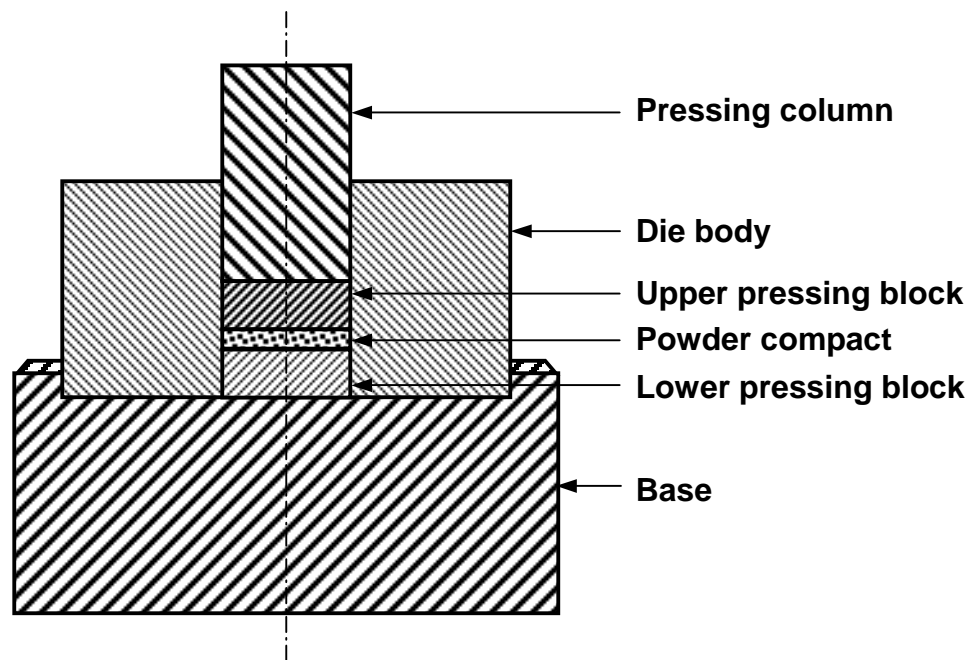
Cross-section view of the cylindrical die used in the study.
